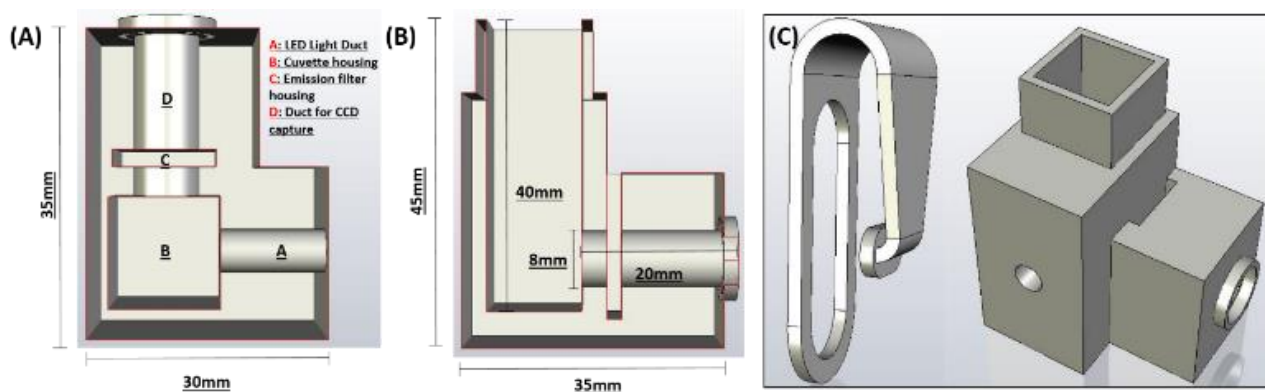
(A) Cross-section of Cuvette holder of Prototype 2 showing the inner optics and individual parts. (B) Diagram showing the physical dimensions of the cuvette holder. (C) Complete design of the cuvette holder and the clip-on connector
